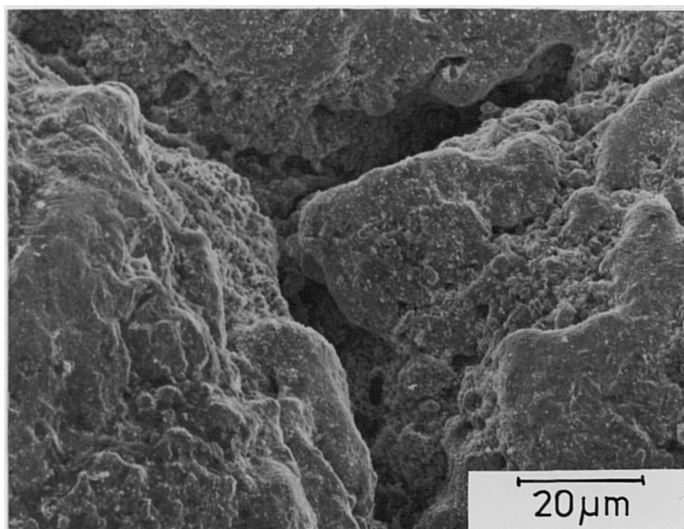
RARDEN gun barrel. Detail of cracking and firing residues within the rifling groove.
